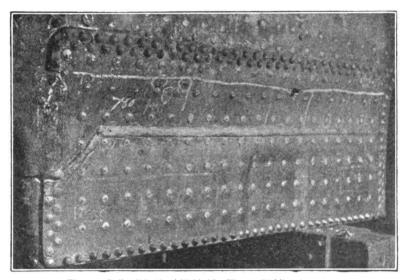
Boiler Side Sheef Welded by Electric Welding Apparatus
